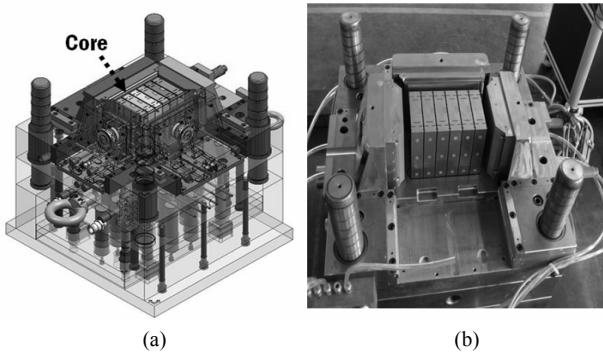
Mold for the manufacture of the plastic battery case: (a) Design of the mold, (b) Manufactured mold.
